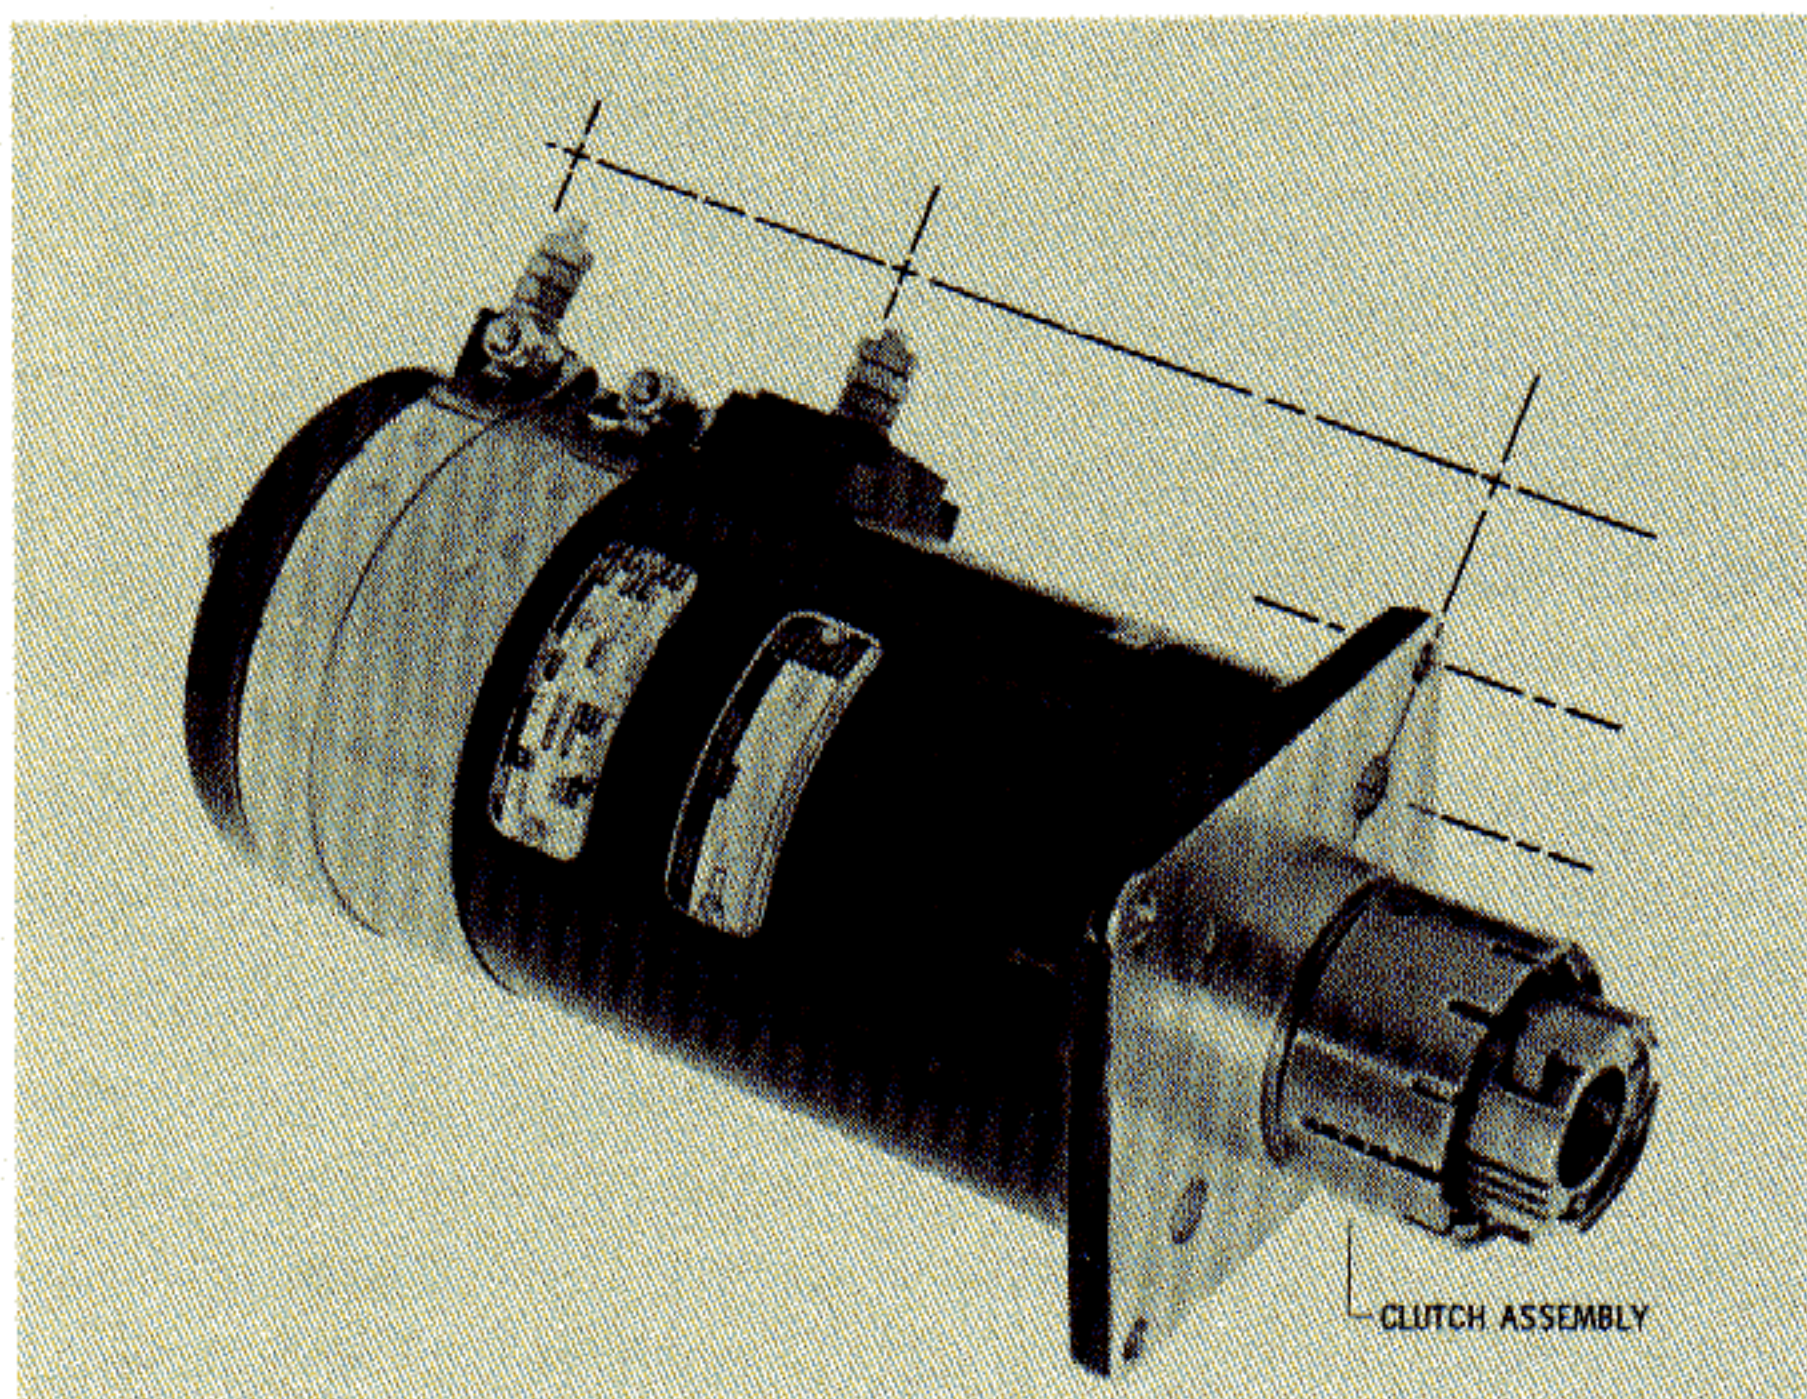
Starter and Clutch Assembly. Note that starter's electrical terminals are aligned with a corner of the starter's mounting pad. Photo Courtesy of the Garrett Corporation
